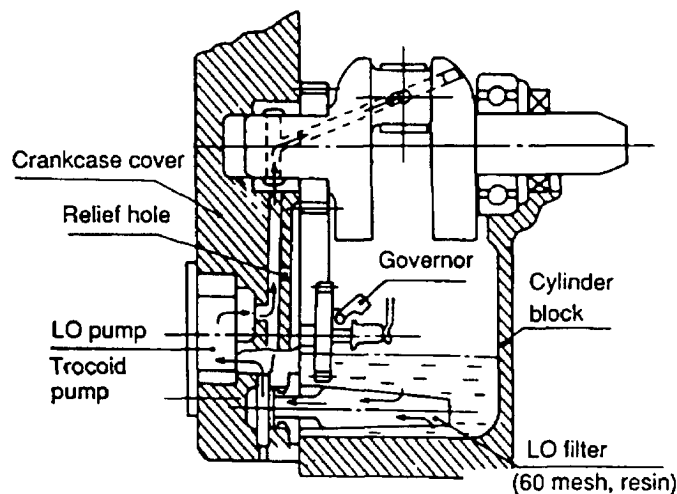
LO filter > Trochoid pump > Crankshaft > Crankpin metal (Lubricating oil route)
